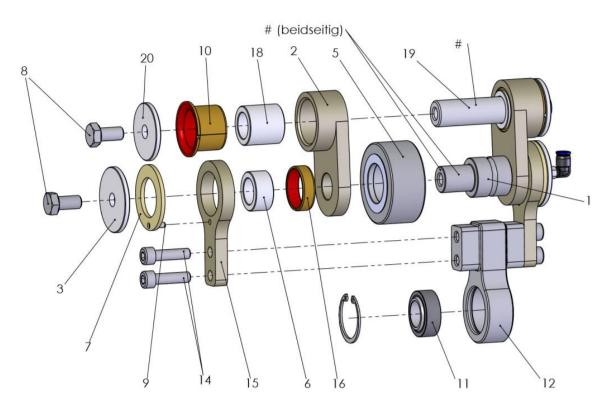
Exploded-view drawing – of the two-joint rocker
